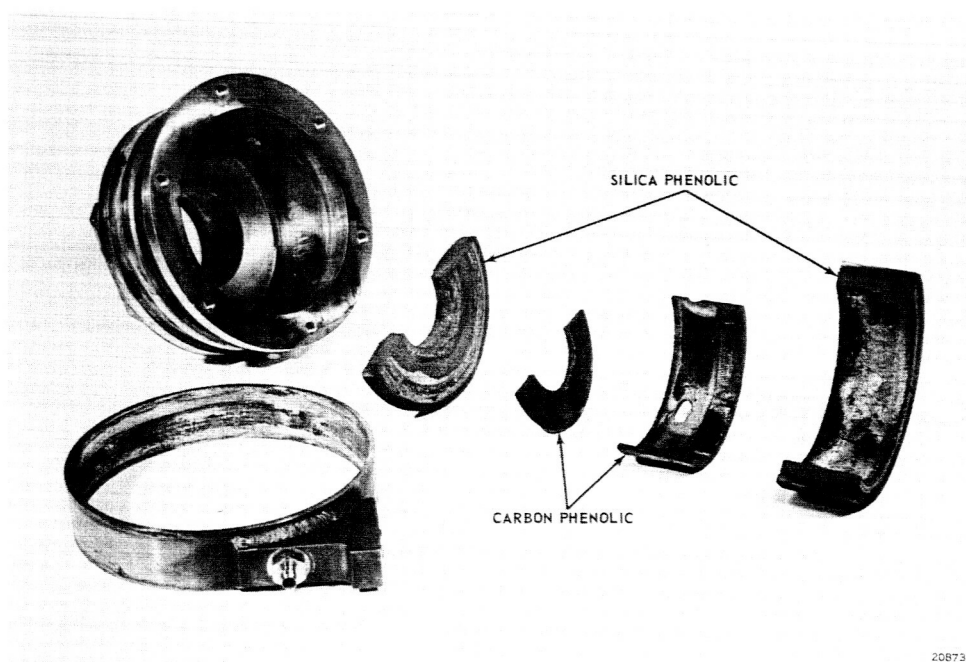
Valve HSG, Insulation, and Control Port Ring
